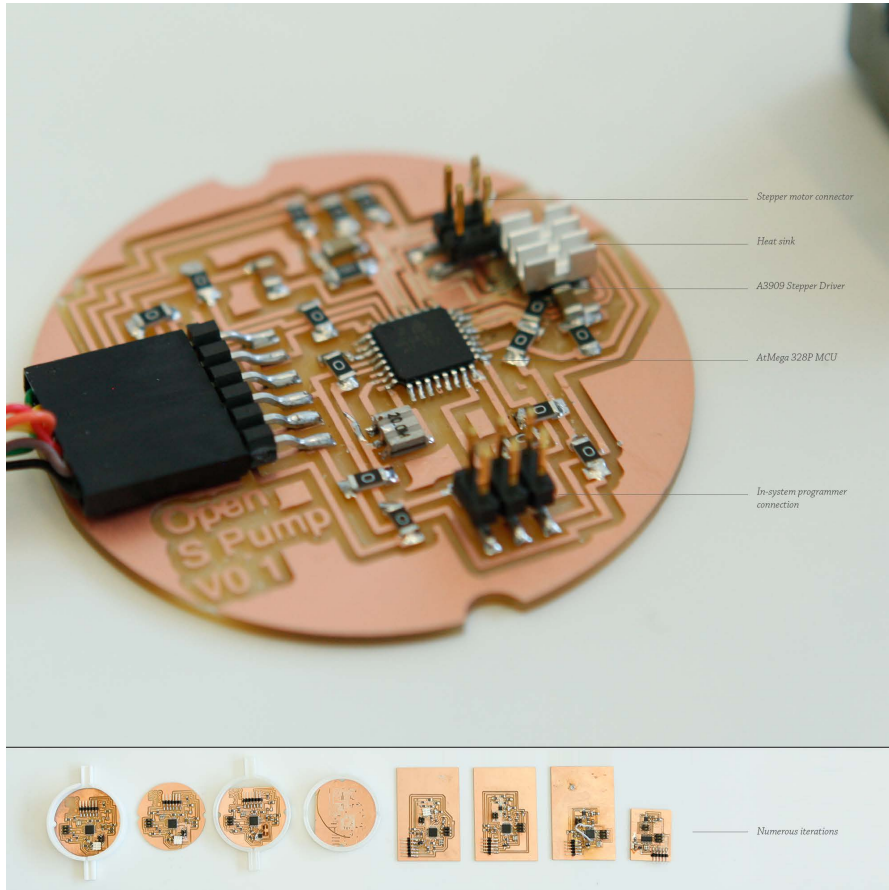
Syringe pump control board. The circuit board traces were milled using a Roland Modela MDX2-20 CNC mill. Serial commands from the Processing UI and 5V DC were transmitted to the circuit board via FTDI USB TTL Serial. The board used a AT-Mega 328P (Atmel, San Jose, California) microcontroller that was programmed via an AVRISP. The AT-Mega 328P was bootloaded with Arduino and used the AccelStepper library to send commands to an Allegro A3909 Dual Stepping Motor driver. A heat sink was attached to the top of the A3909 driver. Photo credit: Che-Wei Wang & Taylor Levy
